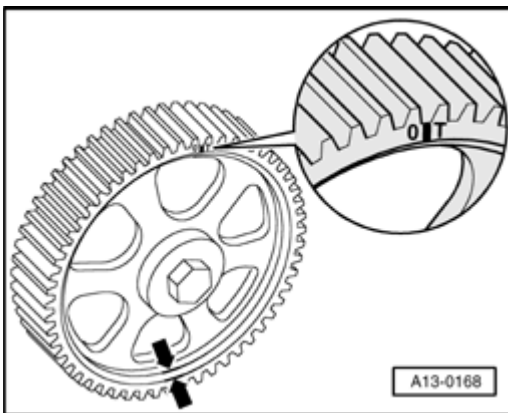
Identifying Camshaft Gear Thin Rib Toward Outside And TDC Marking Visible
